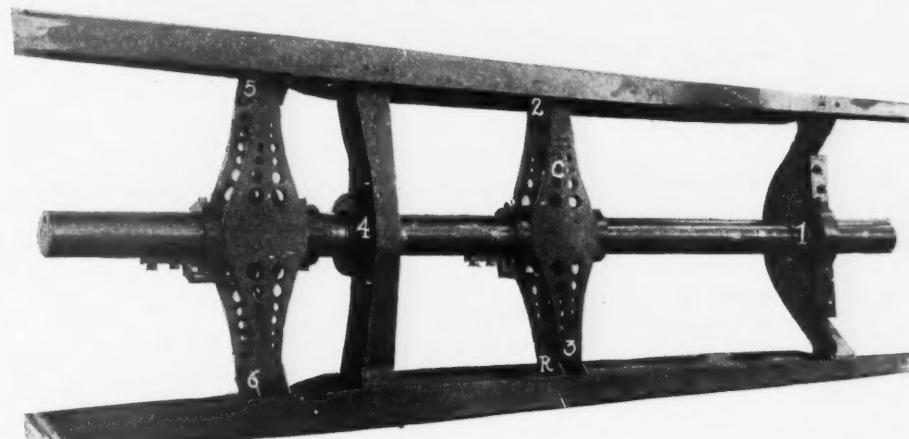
shows the large jig needed to make certain that the holes drilled in the frame for supporting the motor and gearbox as well as the brackets which must be attached to the frame carrying these parts are accurately mounted. To understand this jig it should be remembered that both motor and gearbox is carried at three points, the motor at a trunnion, 1 in front and on frame brackets, 2 and 3 at the rear. The gearbox is carried on a trunnion, 4 in front and brackets 5 and 6 in rear, the support of each being identical.
